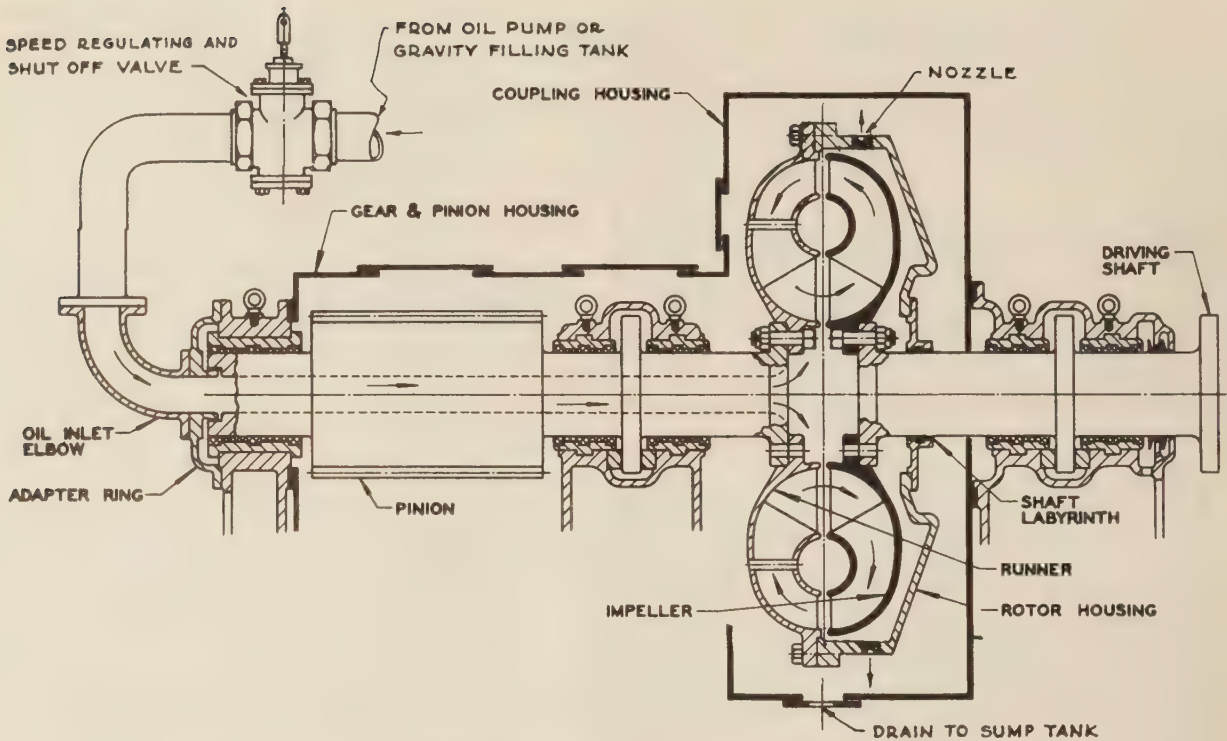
HYDRAULIC COUPLING AND PINION GEAR OF A TYPICAL MARINE INSTALLATION
